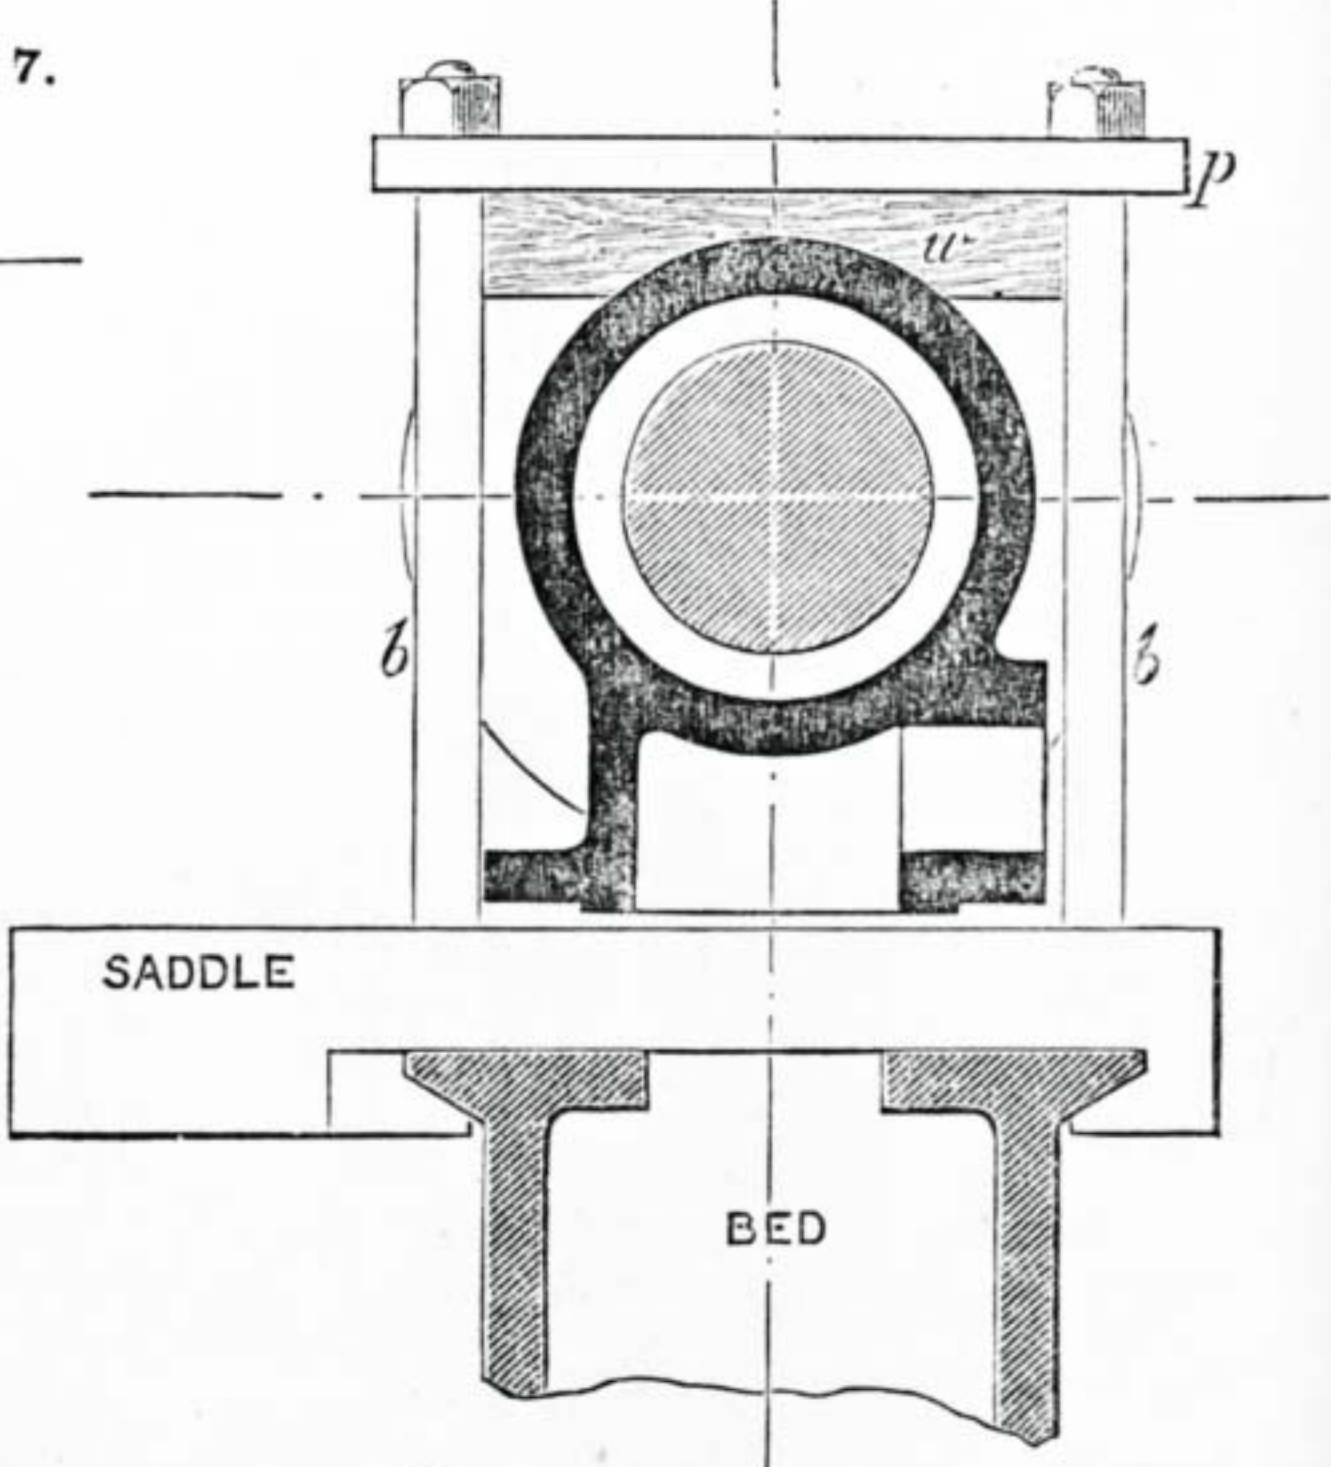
End Elevation and Cross Section of Fig. 4, showing Straps in Position.
